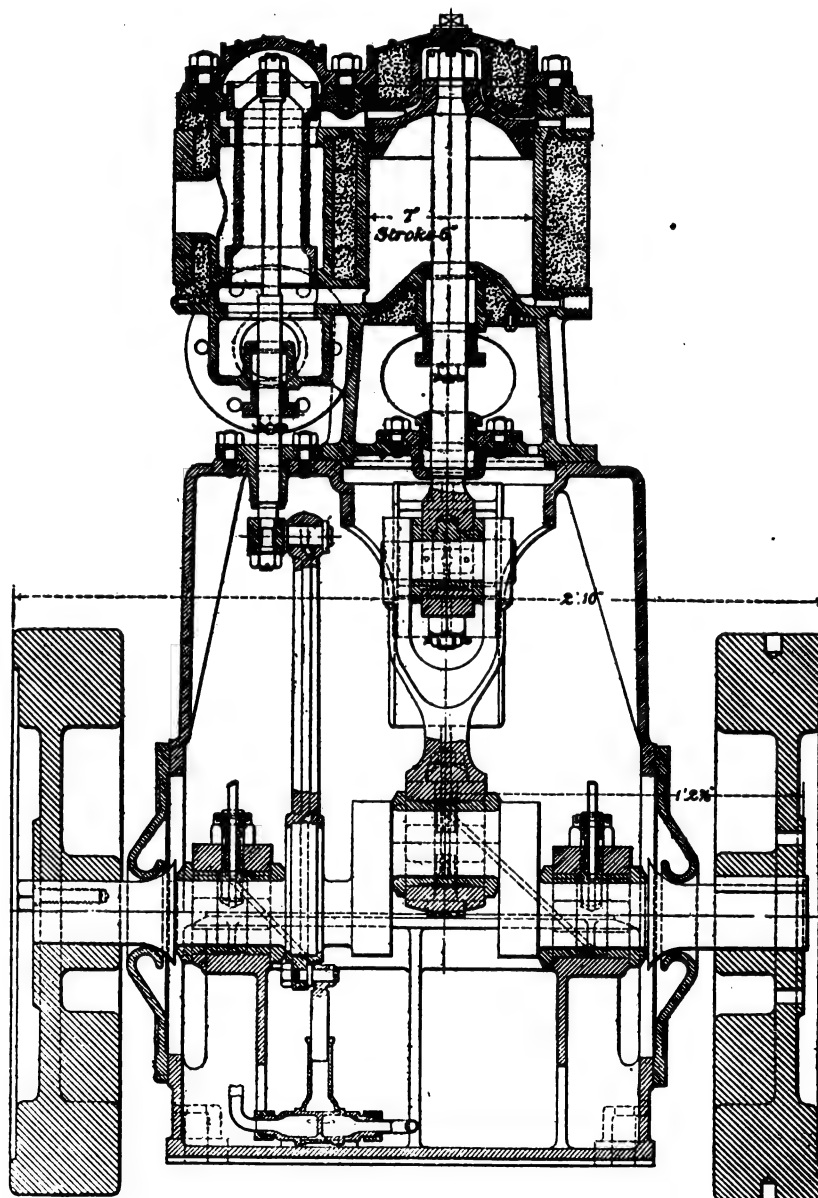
CYCLONE HIGH-SPEED ENGINE.
